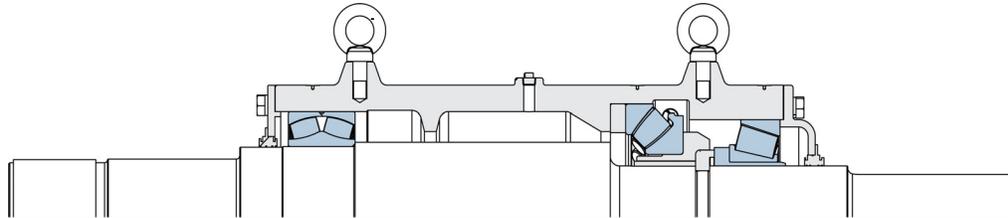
Limited End Float Bearing Assembly with Standard Stiffened Shaft
